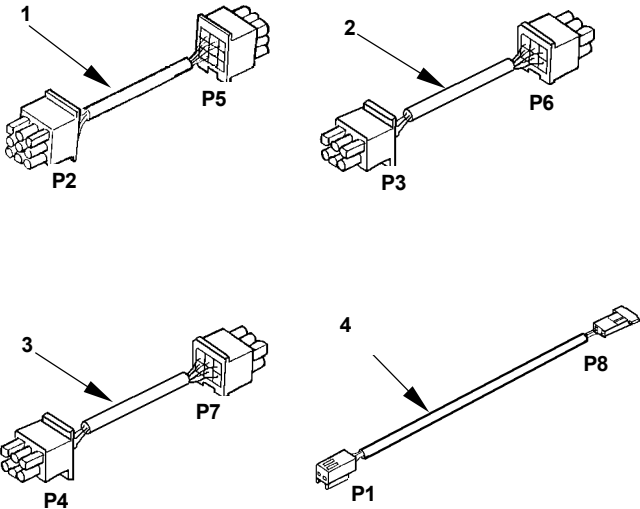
X, Y, Z-Axis, and Valve Drive Cables
